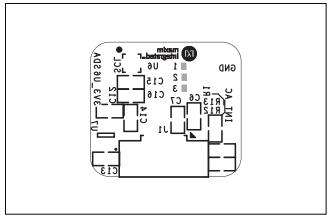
MAX30105 Daughter Board Component Placement Guide—Component Side
